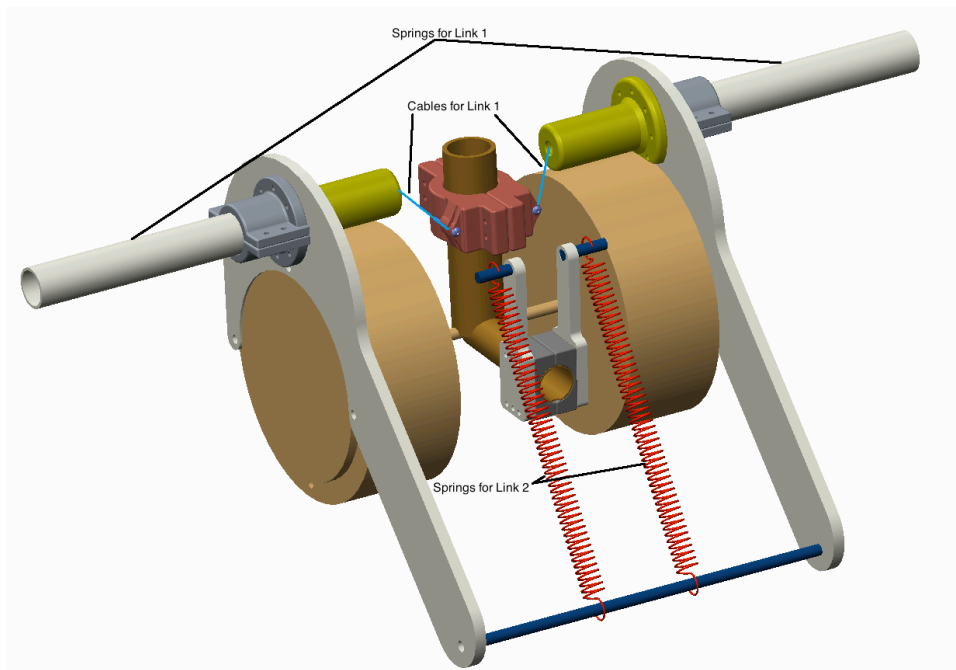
Gravity compensation apparatus with exploded view. Technical drawings for labeled components are provided in Appendix A.
